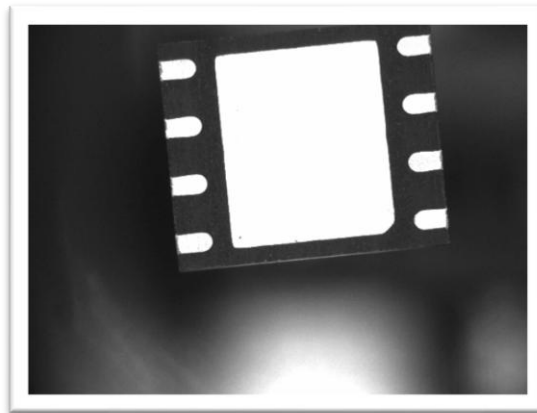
Image of QFN Obtained From Vision Inspection System
